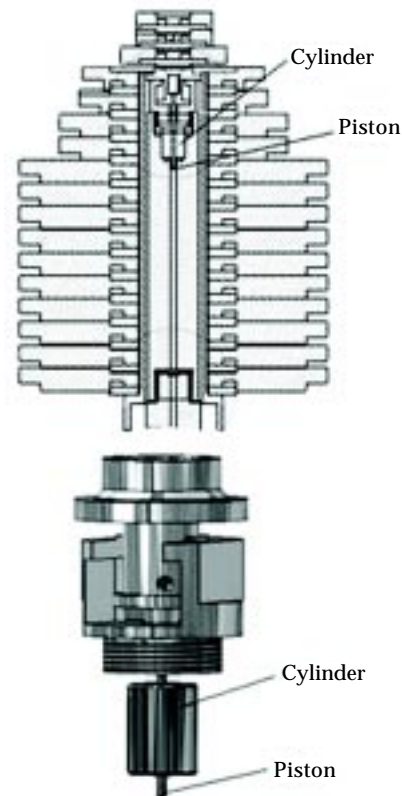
Pressure balance, 120 MPa and Measuring assembly
